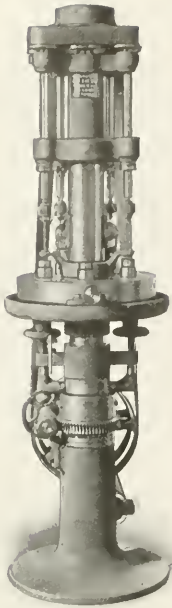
Front View of Bemis Four-spindle Semi-automatic Drill
